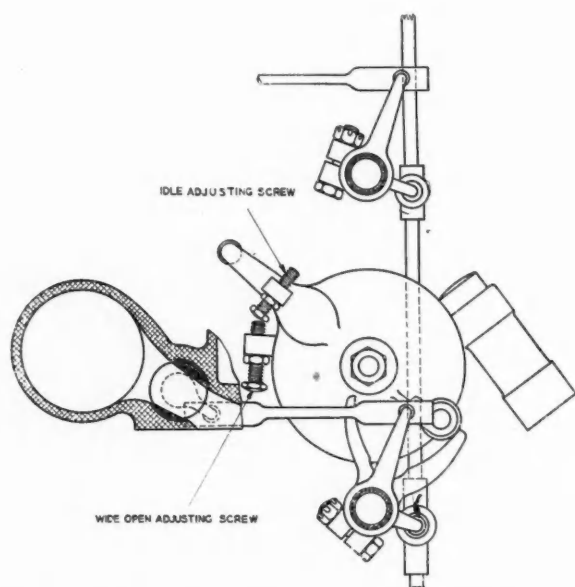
Drawing showing the air throttle valve and throttle mechanism + + +
